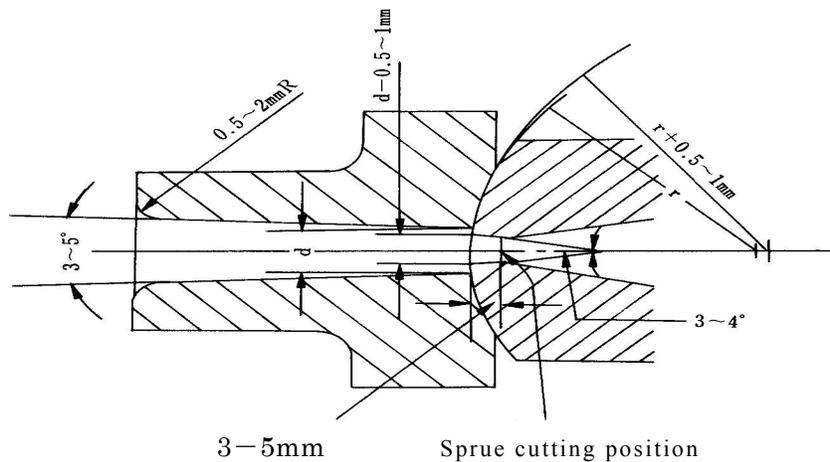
• 2—1 Shapes of the nozzle and the sprue bushing
